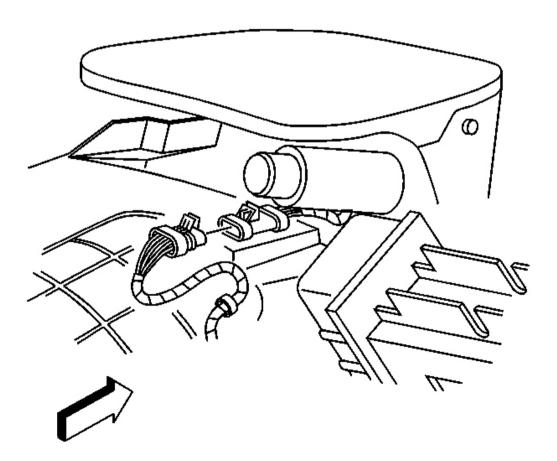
RH Headlamp Wiring Harness Electrical Connector To Forward Lamp Wiring Harness
